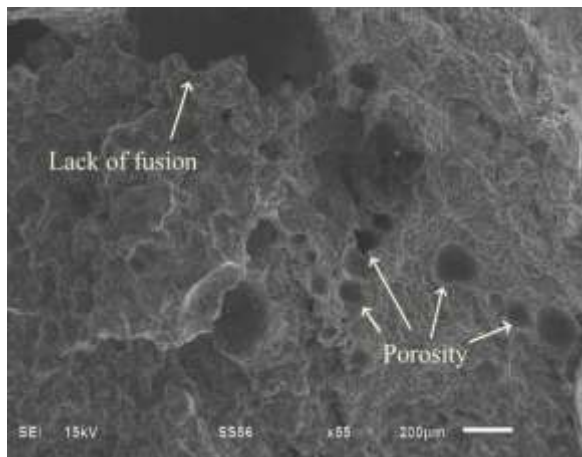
Fracture patterns of HT – Lt tensile sample that failed in the weld metal. There are dimples, alienated porosity, and a lack of fusion.
